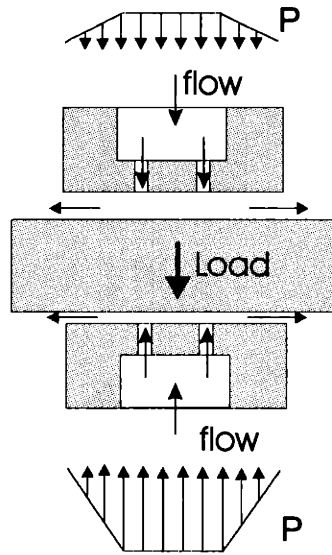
Hydrostatic opposed-pad axial bearing.
